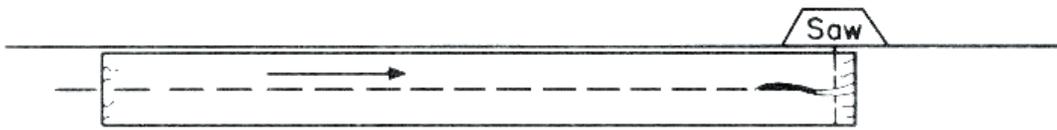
Long end splits usually should be removed at the rip saw rather than at the crosscut saw.
